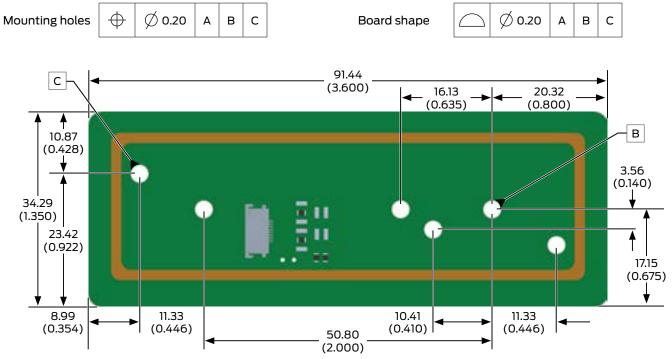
90 mm Antenna Board: Dimensional area and mounting hole locations mm (inches).
